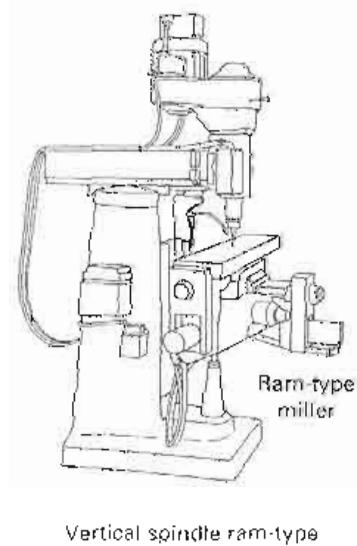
The ram-type knee-and-column milling machine is one of the most versatile and popular milling machine tools ever designed.
